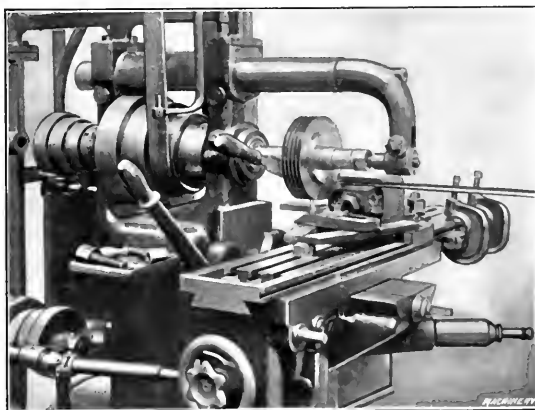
Milling Machine Fixture used for cutting off Calking Strips
